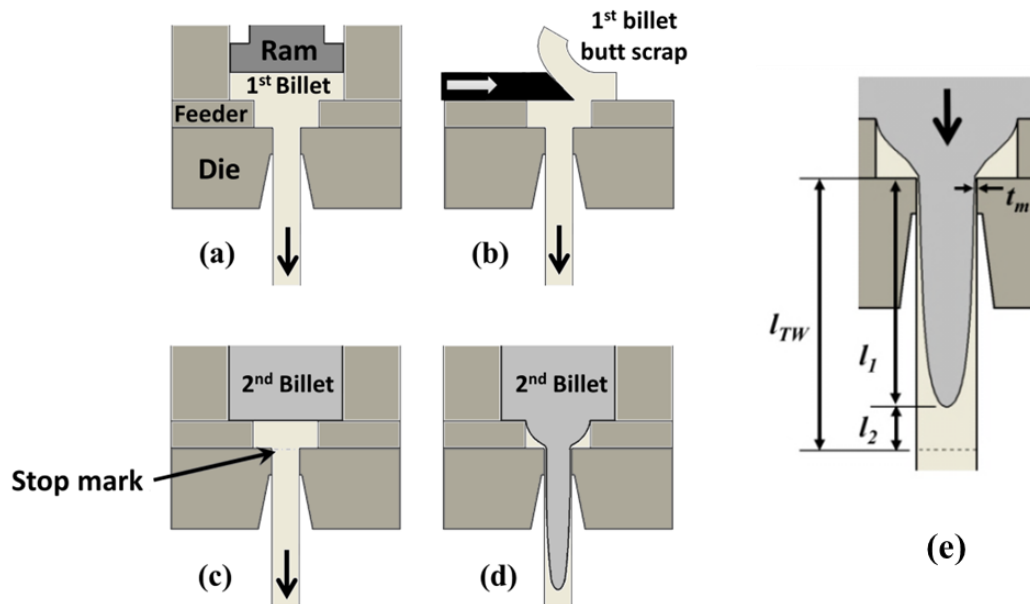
Schematic of transverse weld formation showing: (a) end of the extrusion of the first billet, (b) shearing the 10% billet butt off the first billet, (c) loading the second billet into the container, and (d) beginning extrusion of the second billet, showing the development of the transverse weld, (e) the length of the transverse weld ( $l_{TW}$ ) with minimum clad thickness of  $t_m$  divided into  $l_1$  and  $l_2$ .
